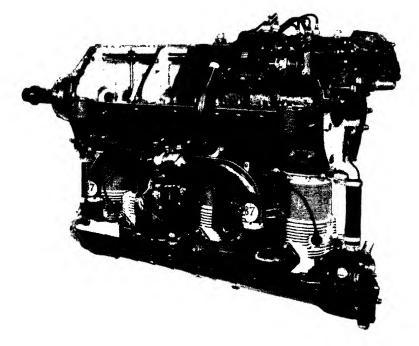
Three-fourths left rear view of an inverted six-cylinder aircooled aircraft engine. The two magnetos are mounted at the top rear of the engine. The hollow magneto drive shaft carries oil to the main bearings. (Courtesy Ranger Aircraft Engines)
